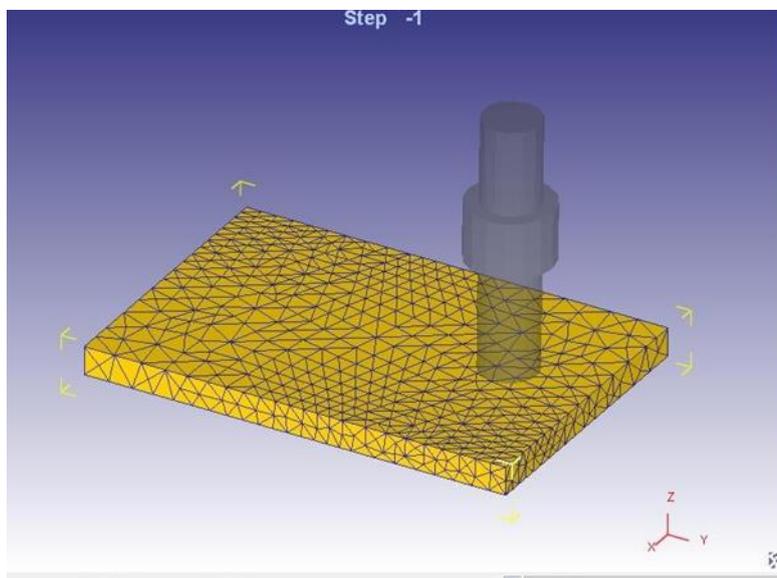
FSW Tool & Plate Mesh of Triangular Pin
